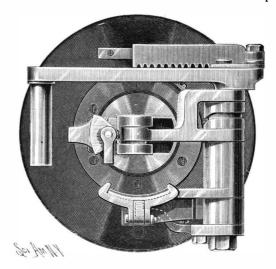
MODIFICATION-HANDLE AND WIPER COMBINED. CAN BE USED TO WORK EXTRACTOR.
